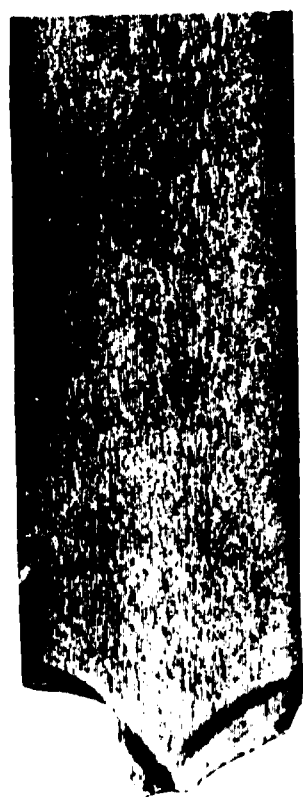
B MACROETCHED CROSS SECTION (100X) THROUGH HALF OF BALLISTIC FRACTURE SURFACE - RIGHT LEG WELD SAMPLE
